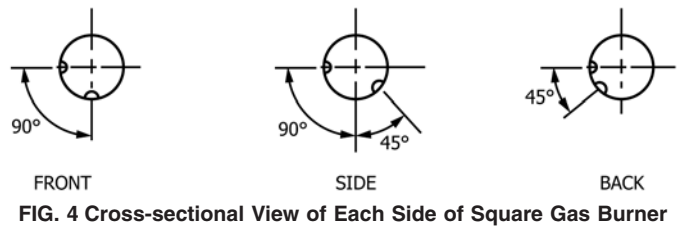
Cross-sectional View of Each Side of Square Gas Burner
